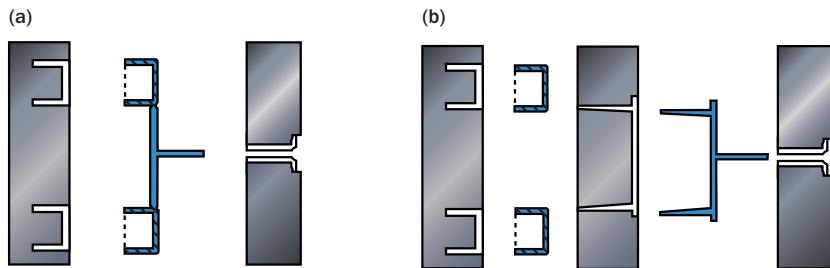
(a) Two-plate mold (b) Three-plate mold
